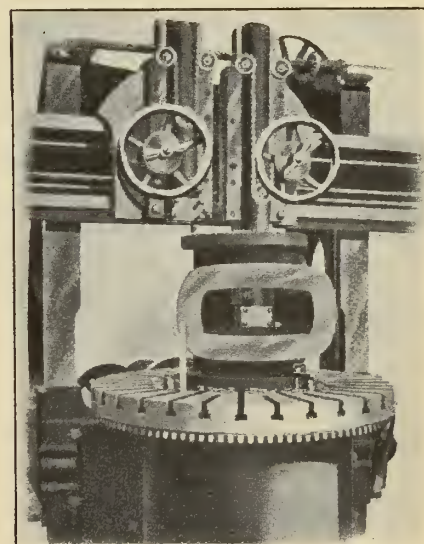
Facing and Boring a Valve in a Double Head Boring Mill.
